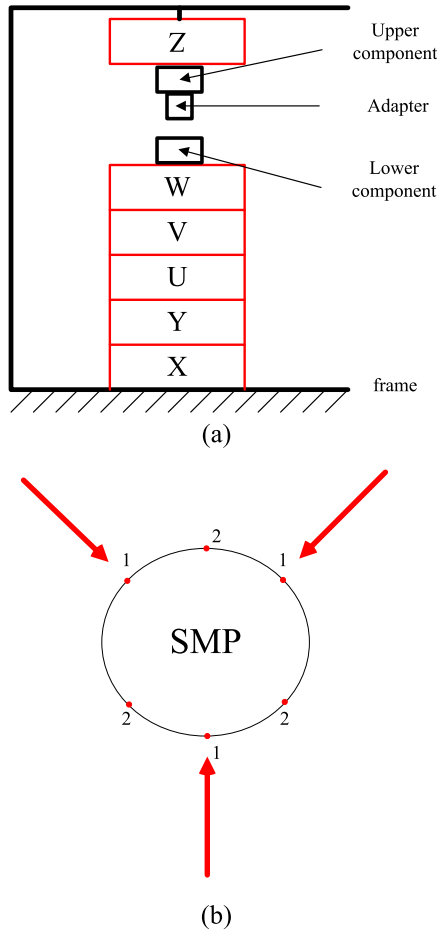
(a) Typical configuration of SMP used in LWS. (b) Schematic of welding process including welding step.
